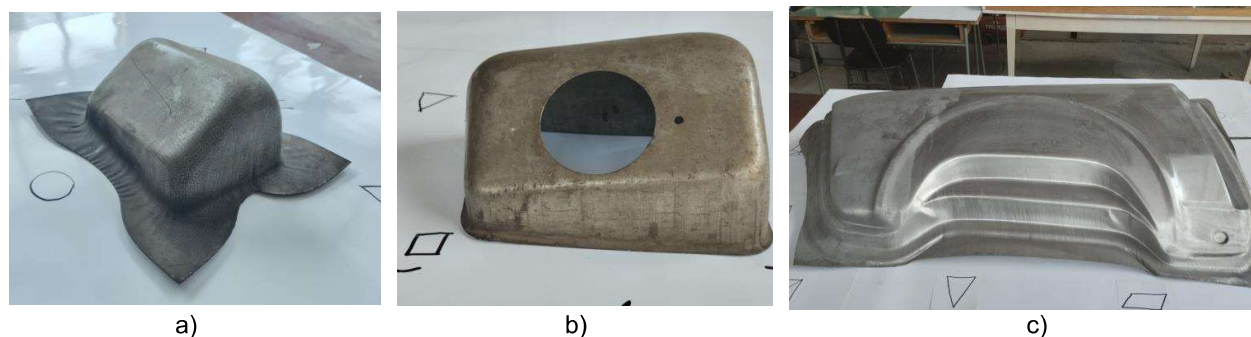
Analyzed parts a) crankcase with rim b) crankcase c) the wing of a vehicle
